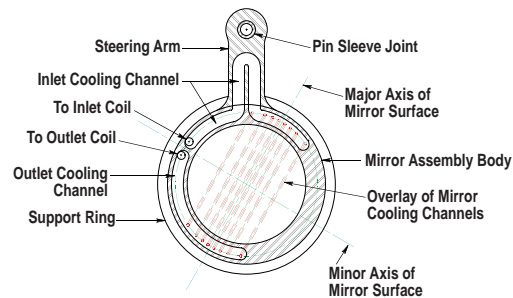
Top view of rotating base and water cooled steering arm with overlay showing the location and orientation of the mirror cooling channels.
